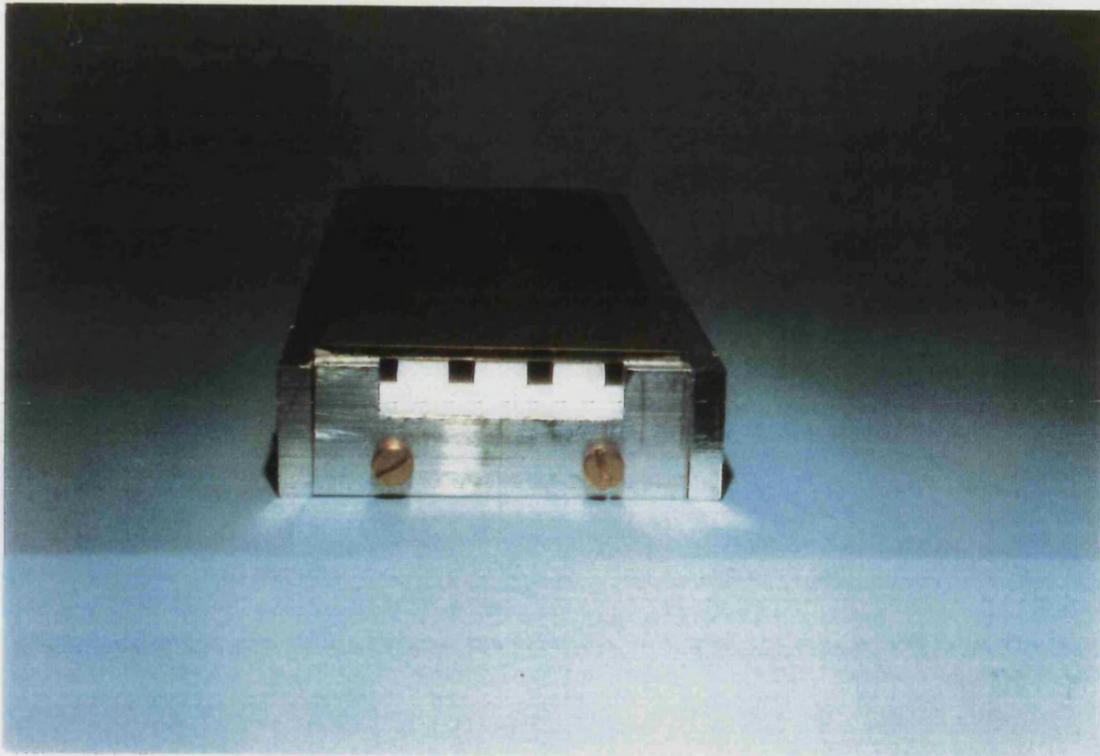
Mould for Producing Work of Fracture Specimens - End View.
